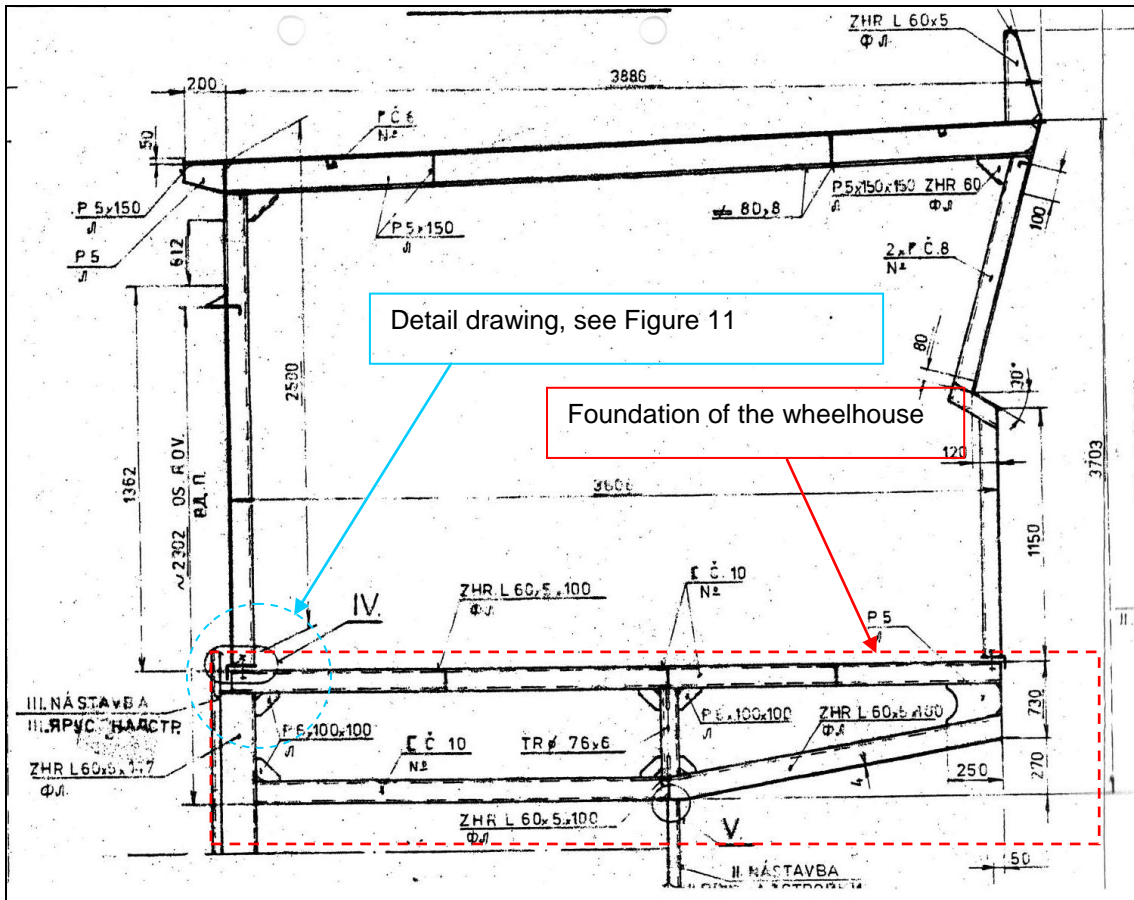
TYUMEN-2, drawing of the wheelhouse (side view)
